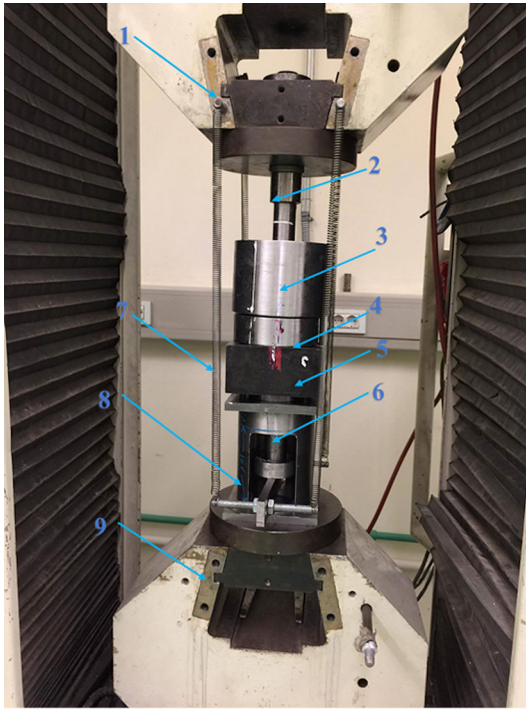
MCSTE setup: (1) upper grip of testing machine, (2) pressing plunger, (3) inlet straight channel die, (4) twisted channel die, (5) exit straight channel die, (6) die base, (7) backpressure springs, (8) support plunger, and (9) lower grip of testing machine.
